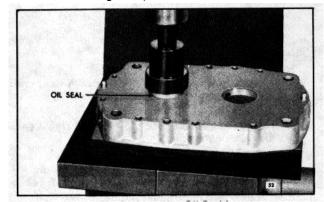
Installing Oil Seal in Blower End Plate using Tool J 6270-3.
